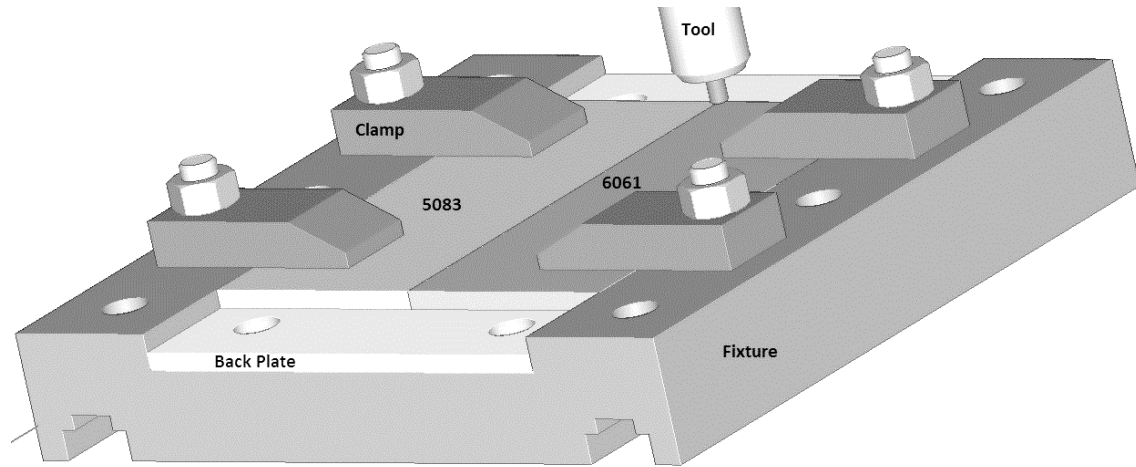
FSW fixture, back plate, clamps and work pieces in position.
